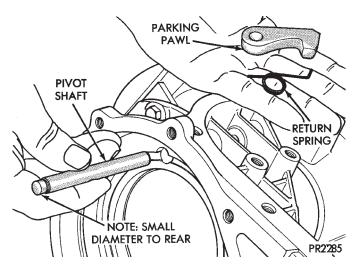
Parking Pawl, Return Spring, and Pivot Shaft
